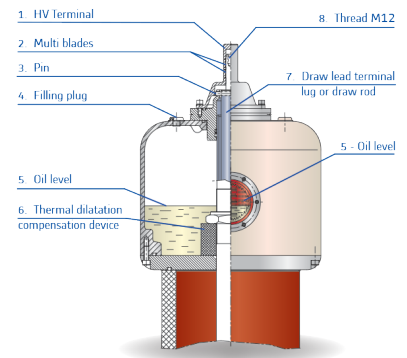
H3 head type (Draw lead or draw rod 245 to 420 kV)
